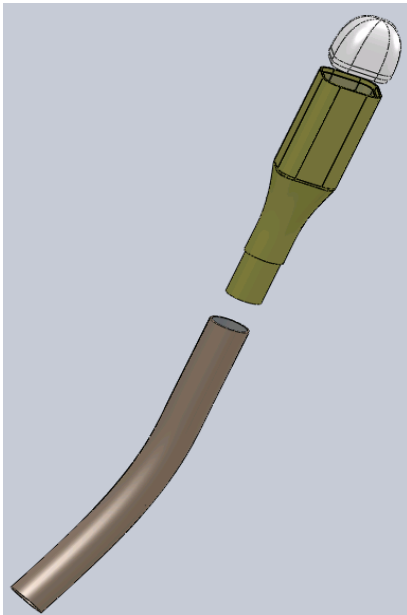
Mechanical drawing for probe housing developed in Biomedical Engineering design class. Prototypes have been fabricated in black Delrin.
